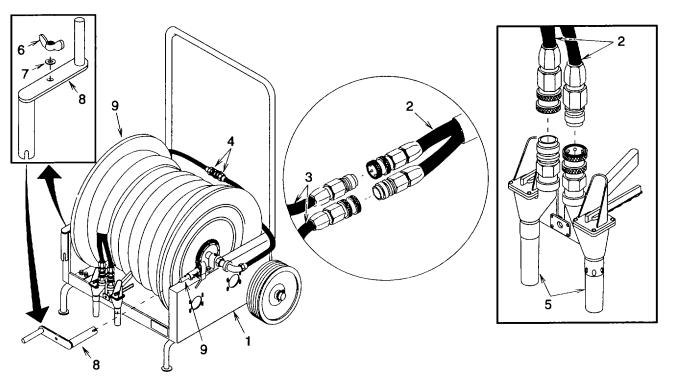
Return Auxiliary Hose Reel Cart to Ready Condition
